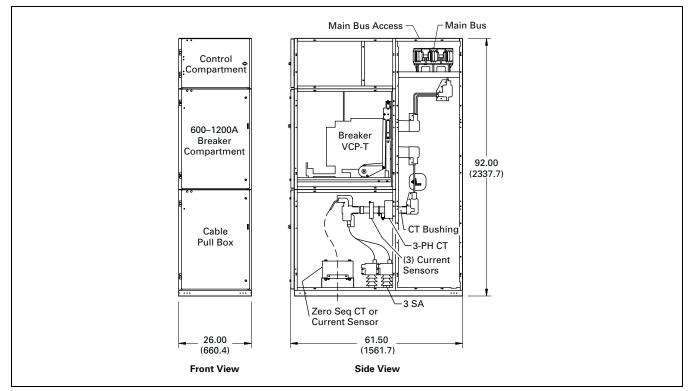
Typical 1-High Breaker Unit, Cables Out the Bottom
